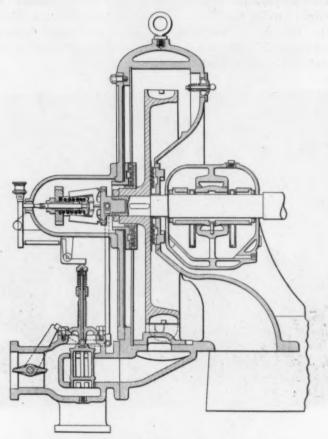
SECTIONAL VIEW OF BLISS TURBINE
